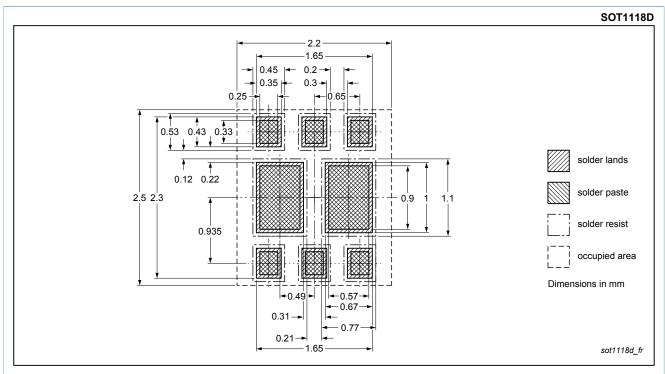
Reflow soldering footprint for DFN2020D-6 (SOT1118D)
